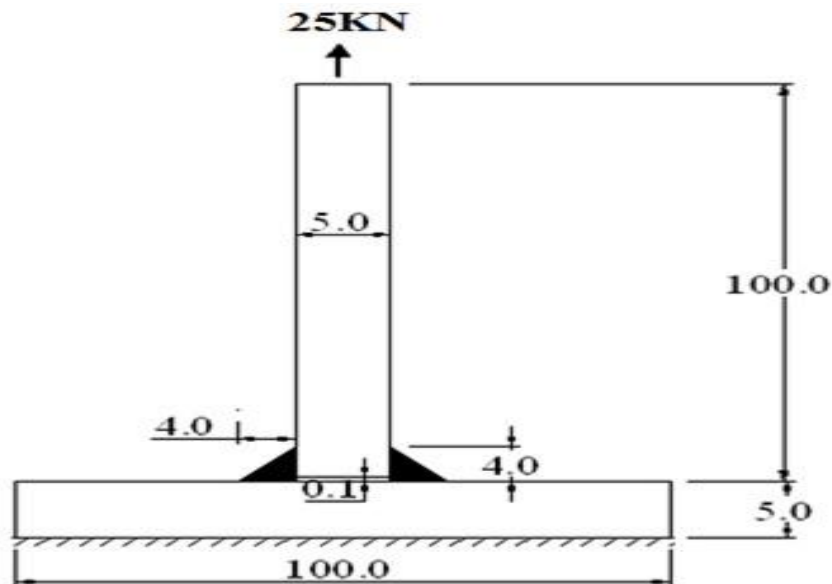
Arc weld of T-joint under tensile load
